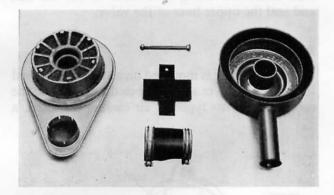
Exploded view of oil bath air cleaner and silencer
